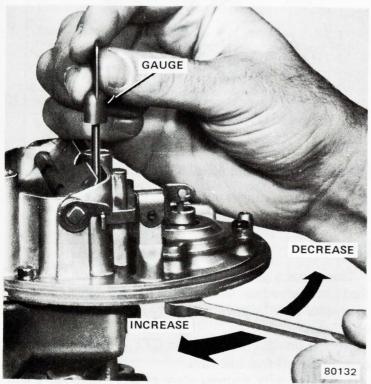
J-107 Initial Choke Valve Clearance Adjustment
